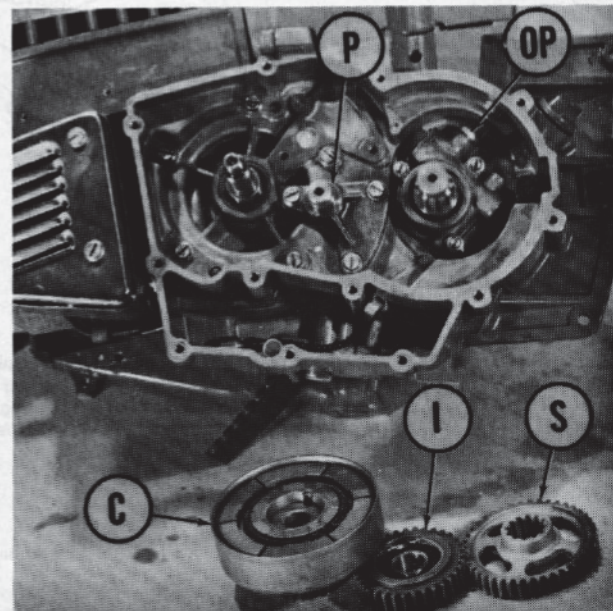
View of gearcase with clutch, idler gear and sprocket gear removed.
